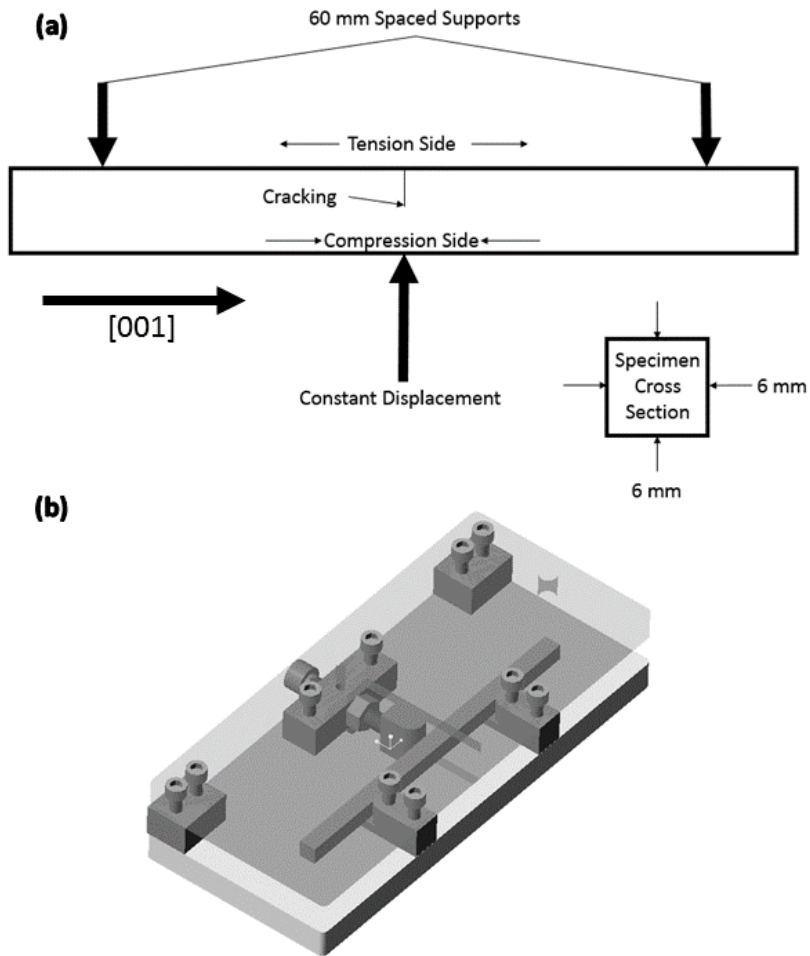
(a) Specimen geometry (b) Three point bend test jig
